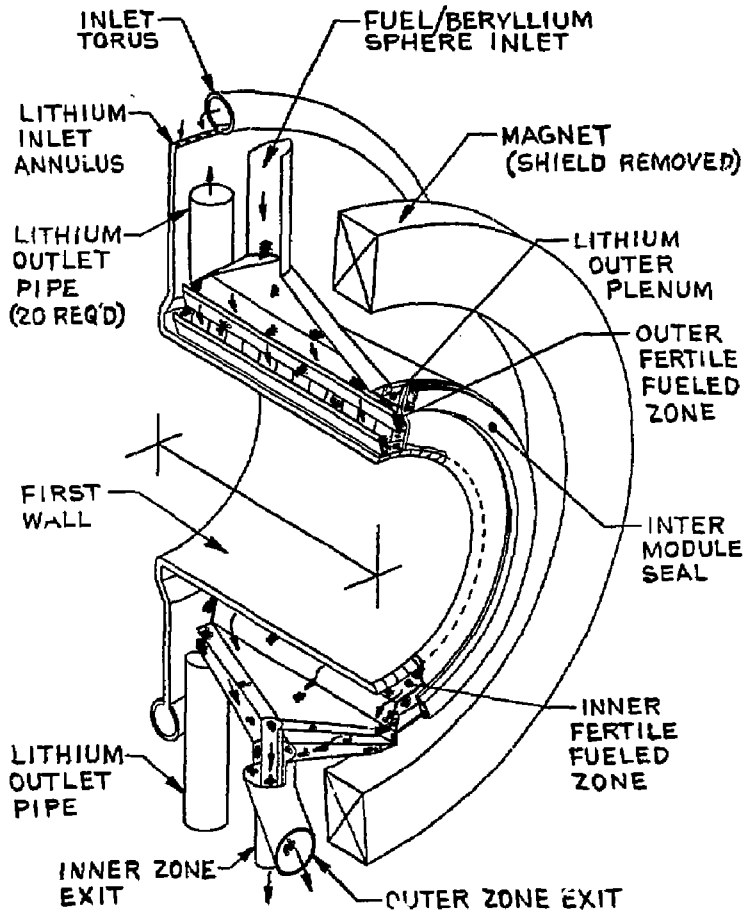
Trimetric of Fusion Breeder Reactor direct cooled blanket module concept showing radial zoning and fuel sphere movement through the blanket.
